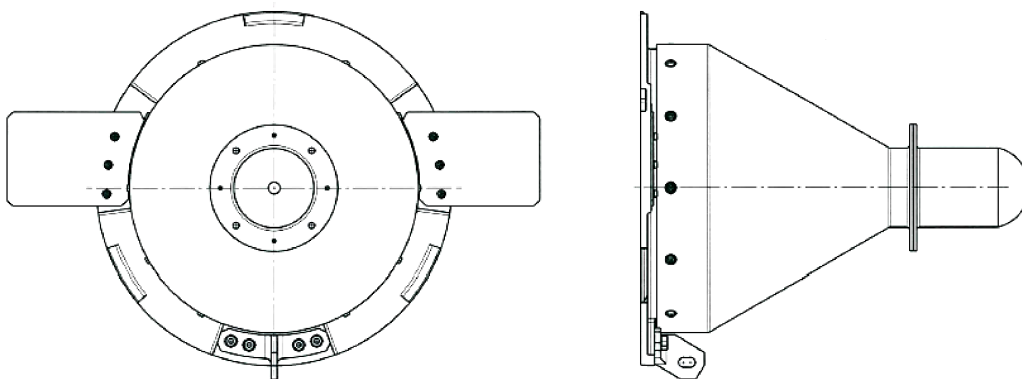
Technical drawing of the female part of the mechanism developed during the STEPS project (credit: TAS-I)
